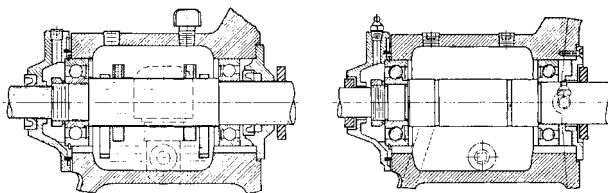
Ball bearings arranged (left) with oil rings in the housing and (right) for grease lubrication
